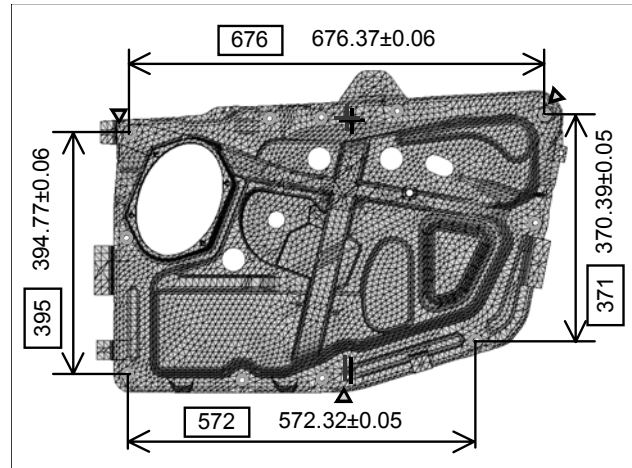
, Measured dimensions on forward door proto-panel, one moulding condition, 16 parts, CAD-dimensions shown in rectangles, measured dimensions showing max/min range.
